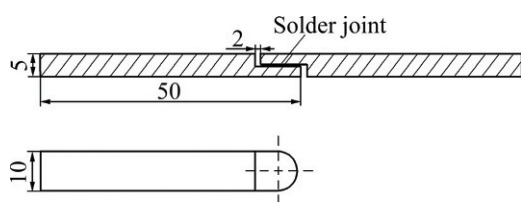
Specimen of lap shear test solder joint (unit: mm)
